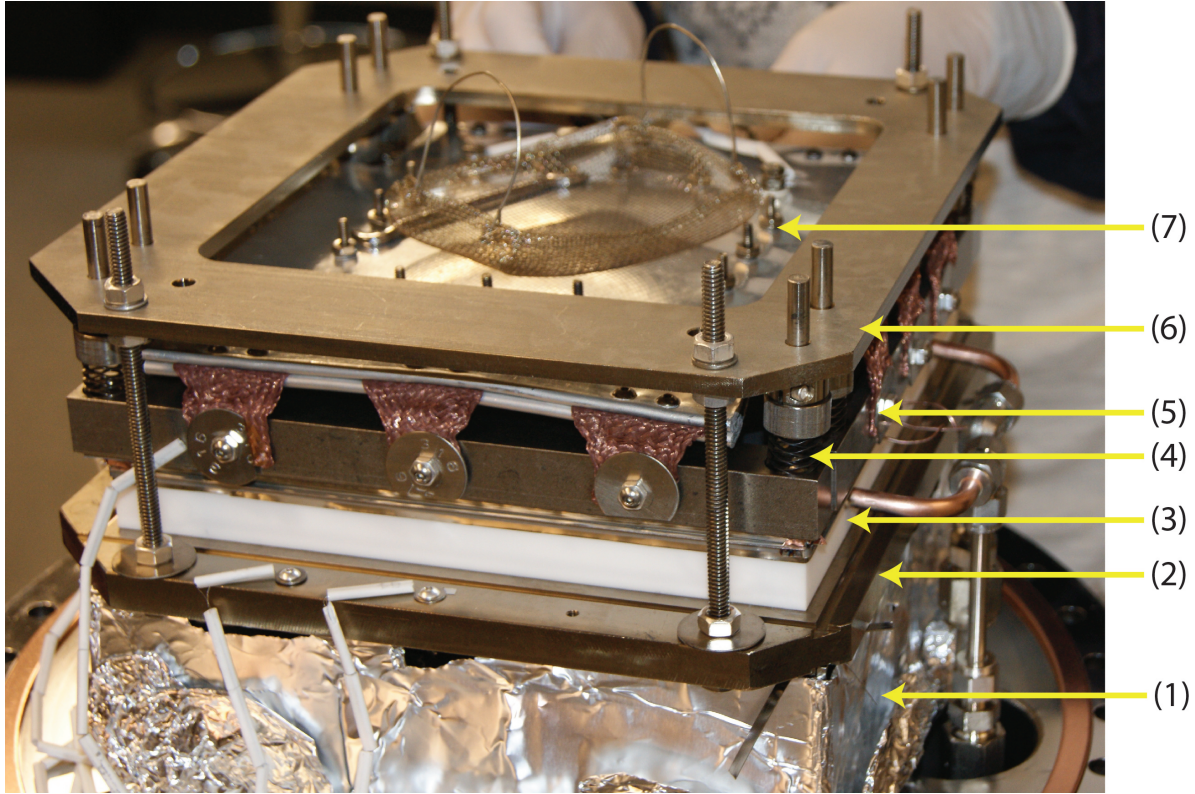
An assembled tile clamped in place in the compression fixture prior to sealing. The indicated components are: (1) the lower NiCr heater assembly; (2) the bottom compression fixture plate; (3) the tile assembly consisting of ceramic base, internal components, and glass window; (4) the compression mechanism; (5) floating rigid press bars; (6) the upper compression fixture plate; and (7) the upper NiCr heater assembly.
